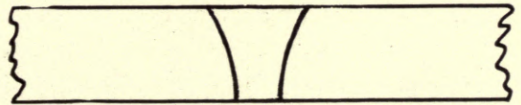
Diagram of Section of Weld in Sample No. 4
